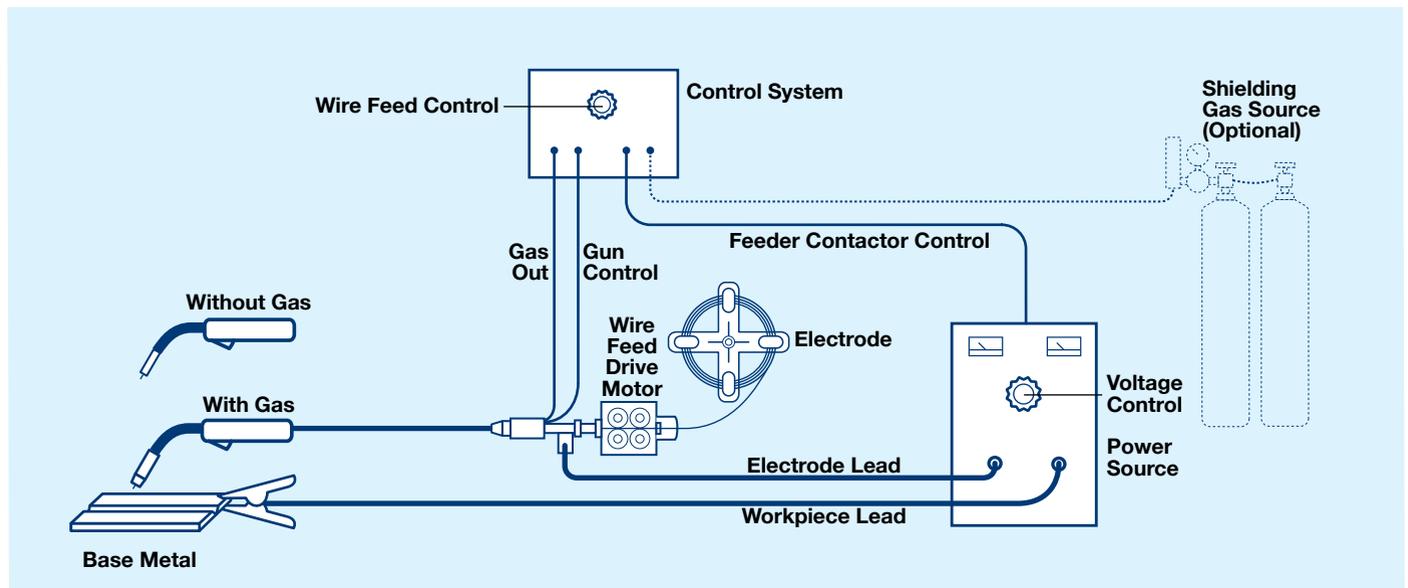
Equipment for Flux Cored Arc Welding
